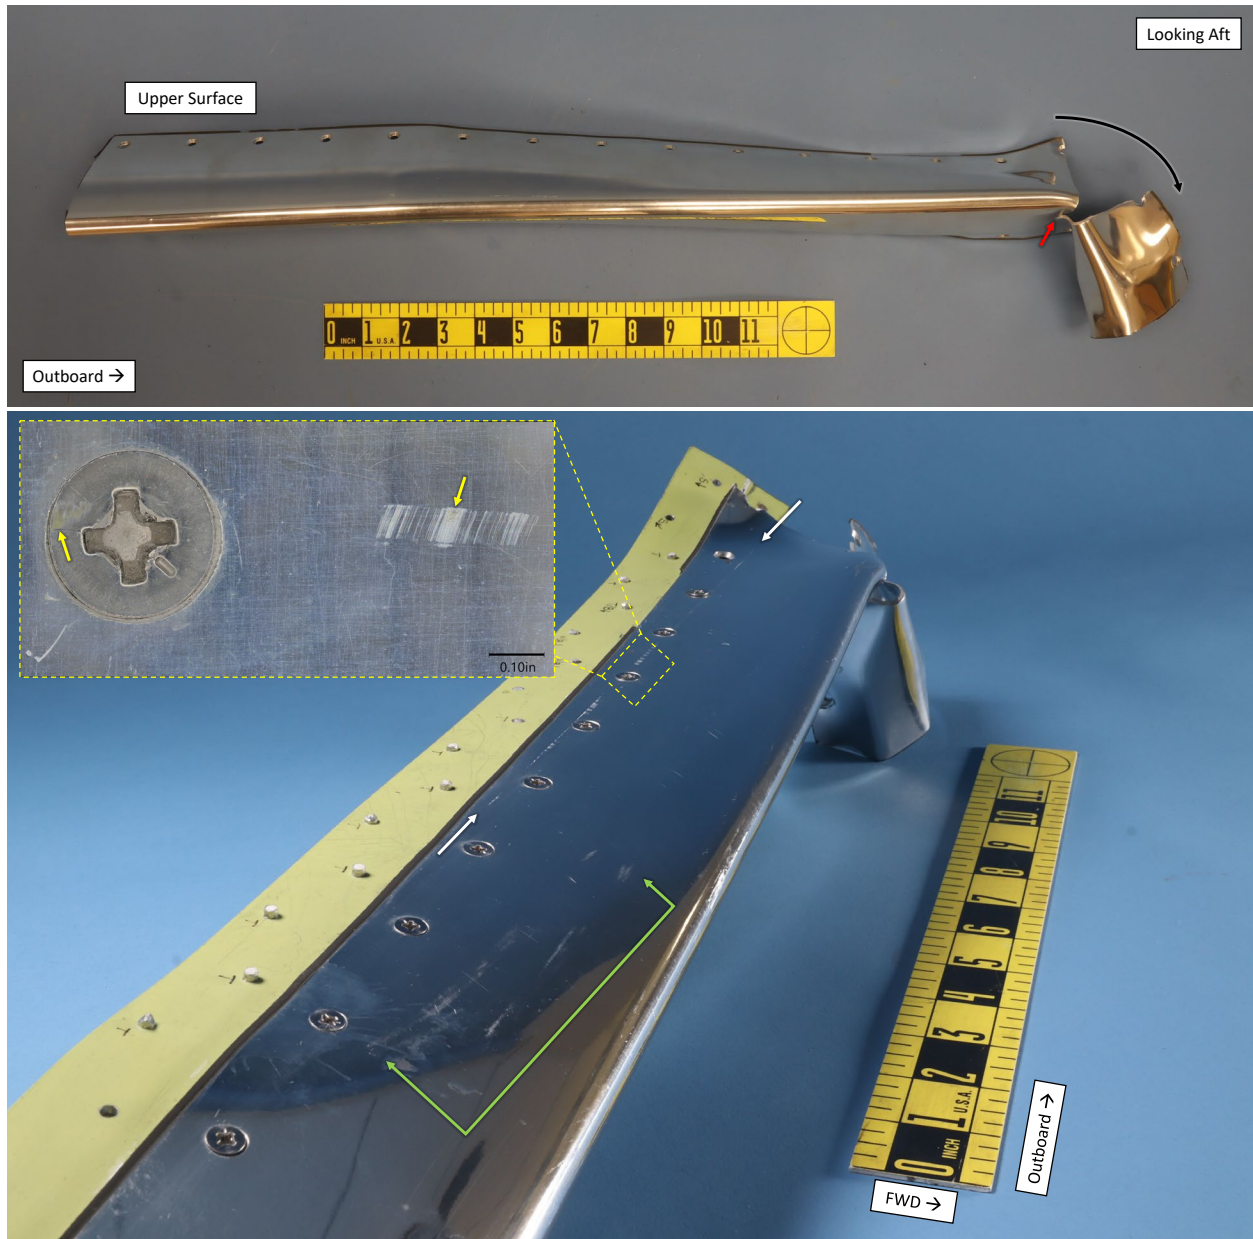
Upper: Photograph of the leading edge component as disassembled from the wing extension assembly showing downward bending (black arrow) near the outboard end from the fracture which arrested on the lower surface near the apex of the leading edge as indicated by the red arrow. Lower: Photograph looking outboard along the leading edge assembled to the forward spar components. A linear streak observed on the upper surface spanned between the two white arrows. A closer view of the boxed area, shown in the inset image shows parallel chordwise scratches and two areas of yellow material transfer indicated by yellow arrows. Abrasions and scratches were also observed in the area indicated by a green bracket.
